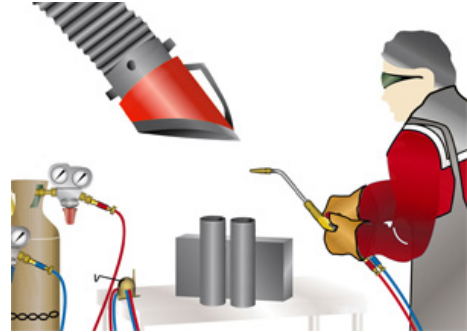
Fume extractors suck contaminated air away from the welder.
